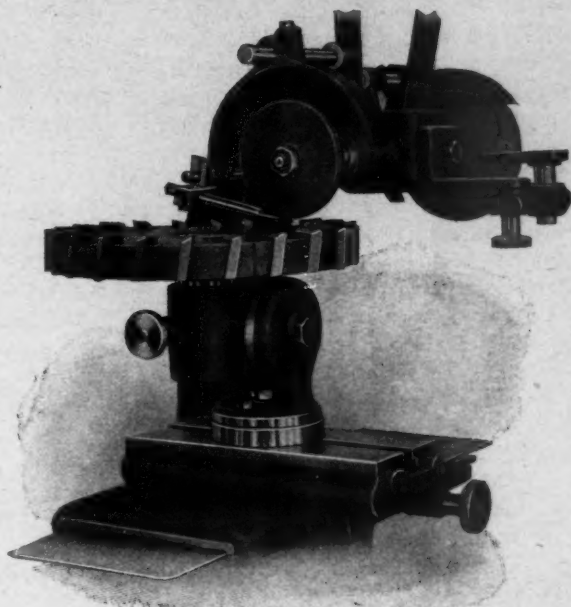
SHARPENING INSERTED TOOTH FACE MILL.
